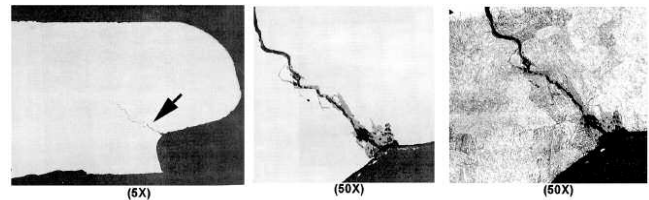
SCC Crack in the Upper Steeple Serration-L-1 Blade Attachment.
